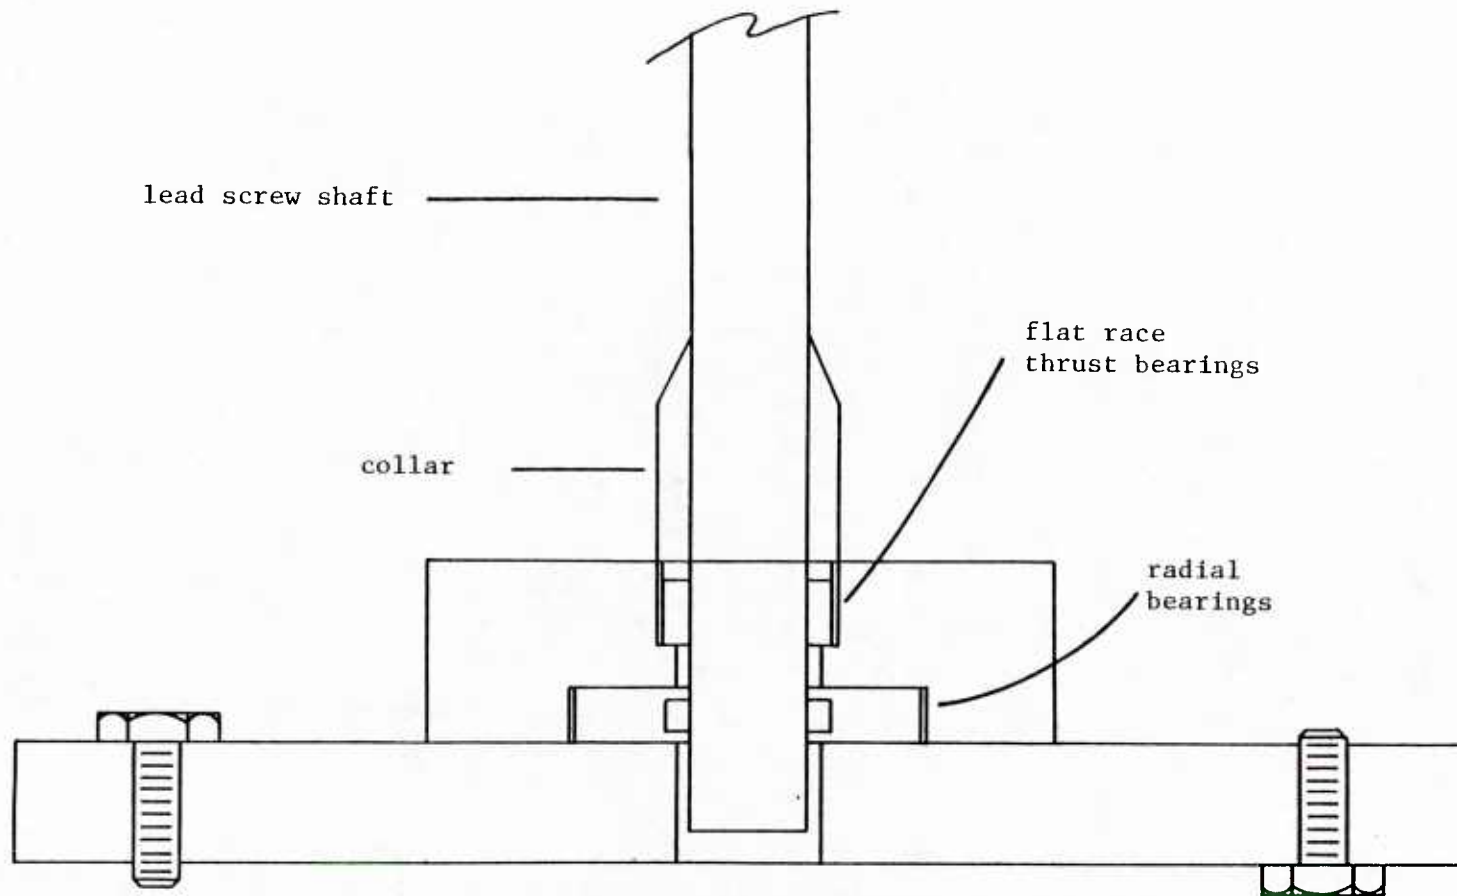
Detail of Lower Lead Screw Shaft Assembly
